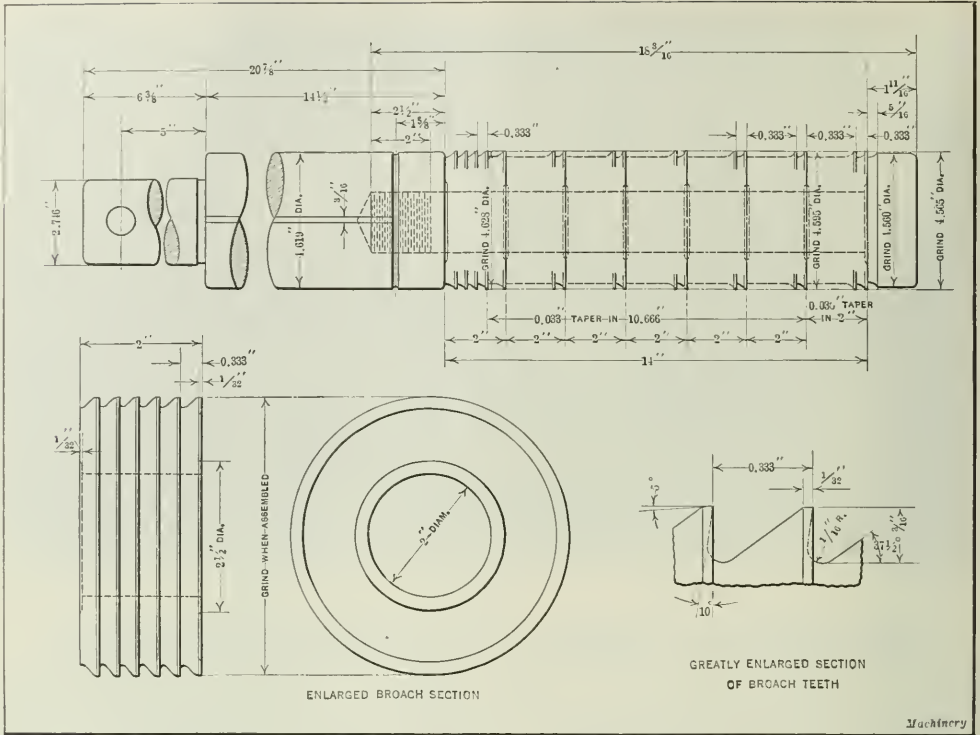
Broach made in Sections, which is used in finishing the Holes in Stators
